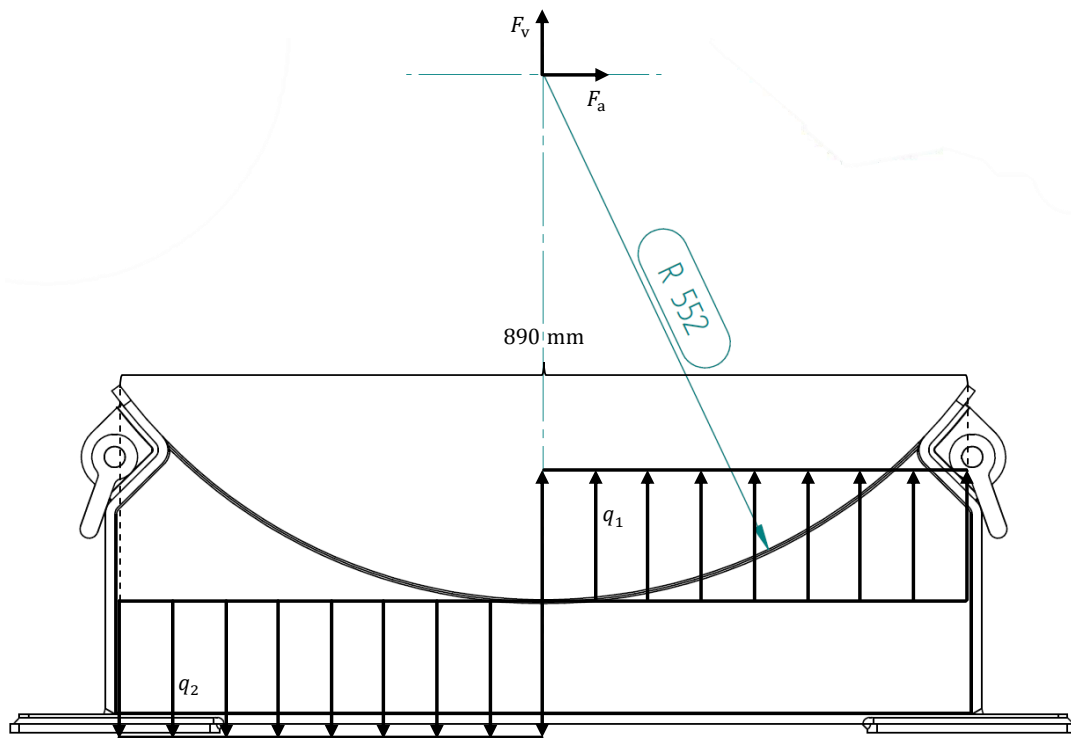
Mechanical model for the welding seams between the feet and the outer shell
